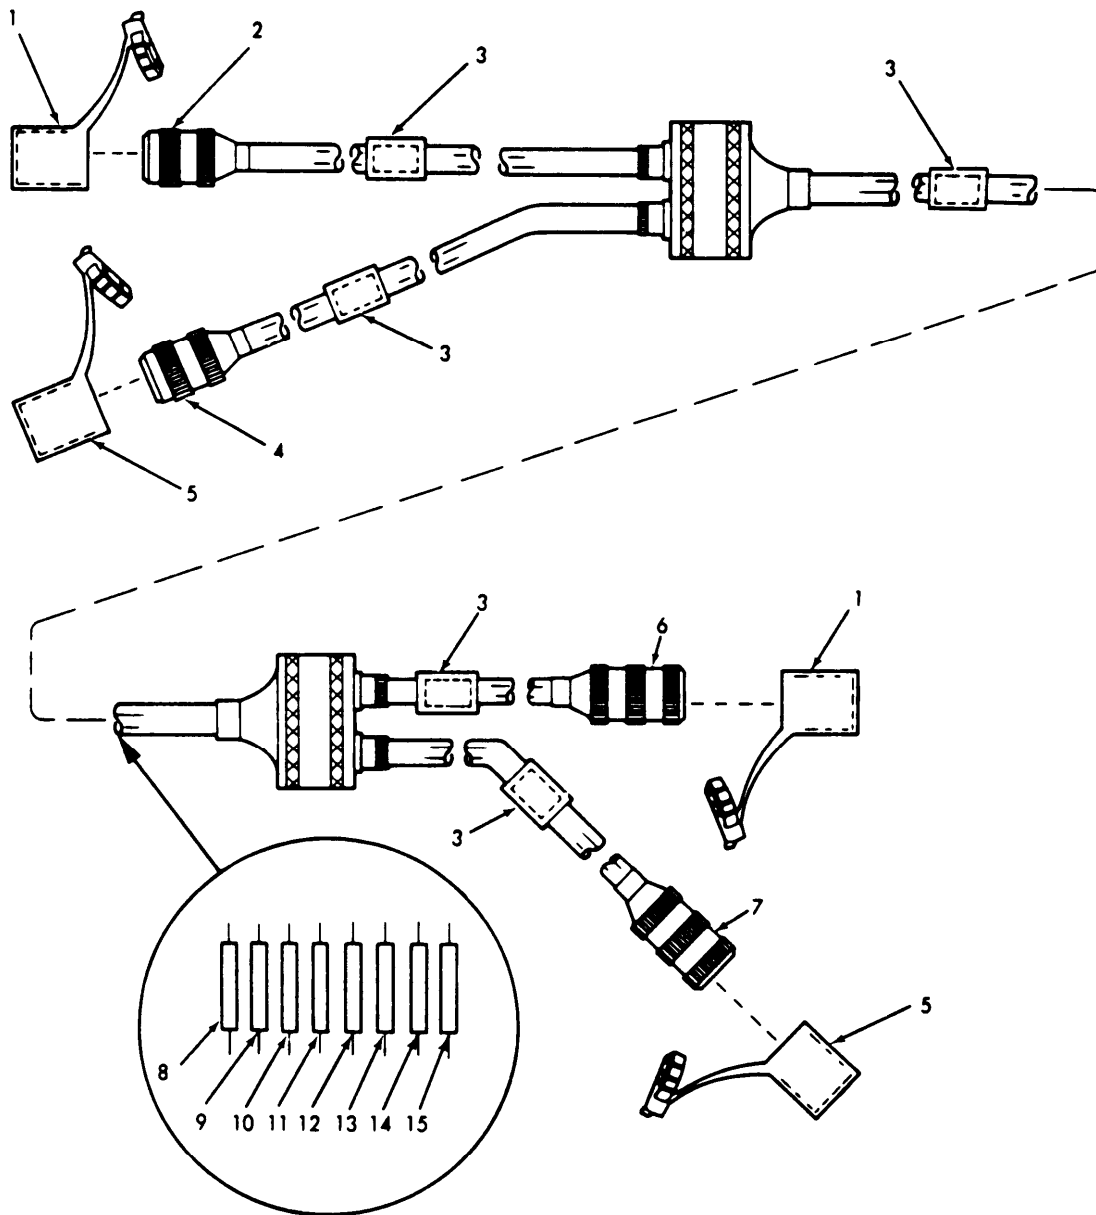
CABLE ASSEMBLY W4 COMPONENT PARTS (ASSY P/N 12303428) AND ELECTRICAL PLUG CONNECTOR P4, P3.
